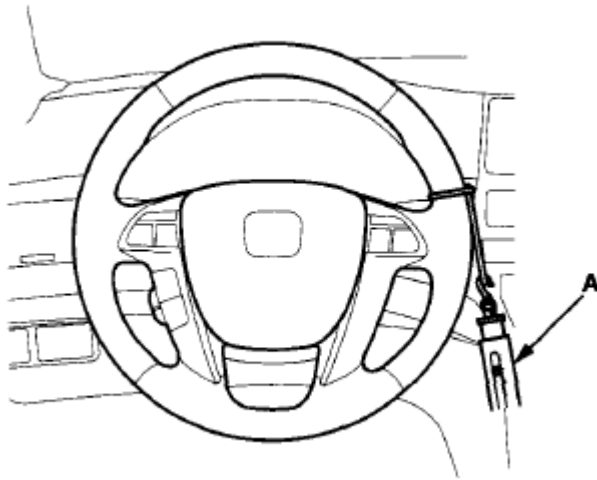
Attaching Commercially Spring Scale To Steering Wheel
